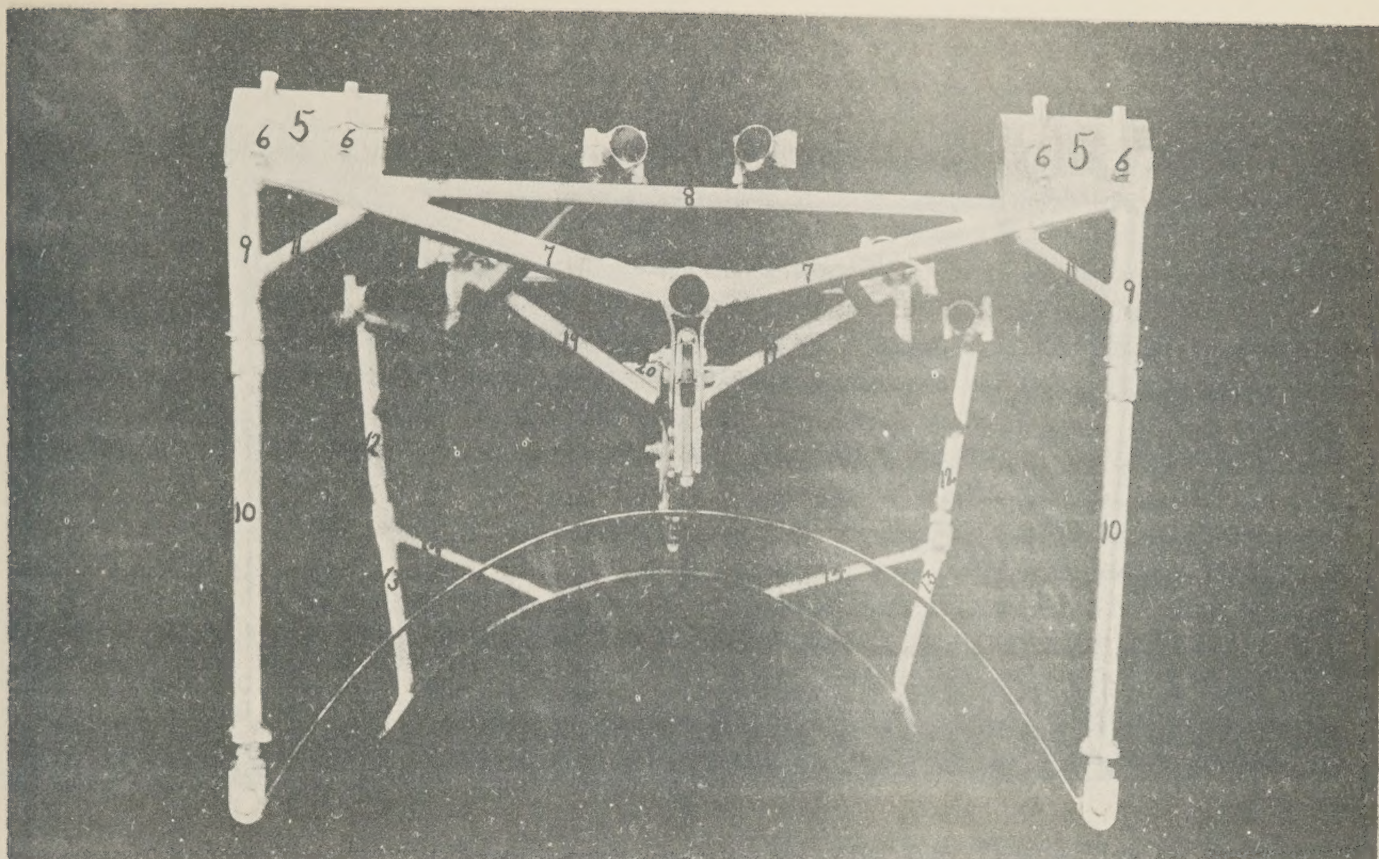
Rear view of supports and sway braces used for attaching bomb-shackle assembly to plane. (See text for explanation of figures.)
